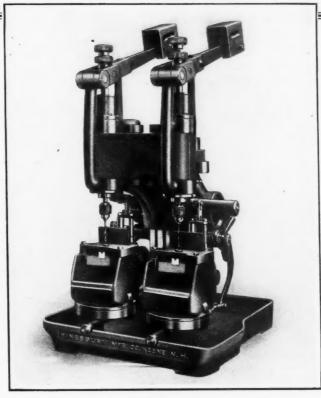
Machine equipped with Automatic Pin Drilling Jigs
